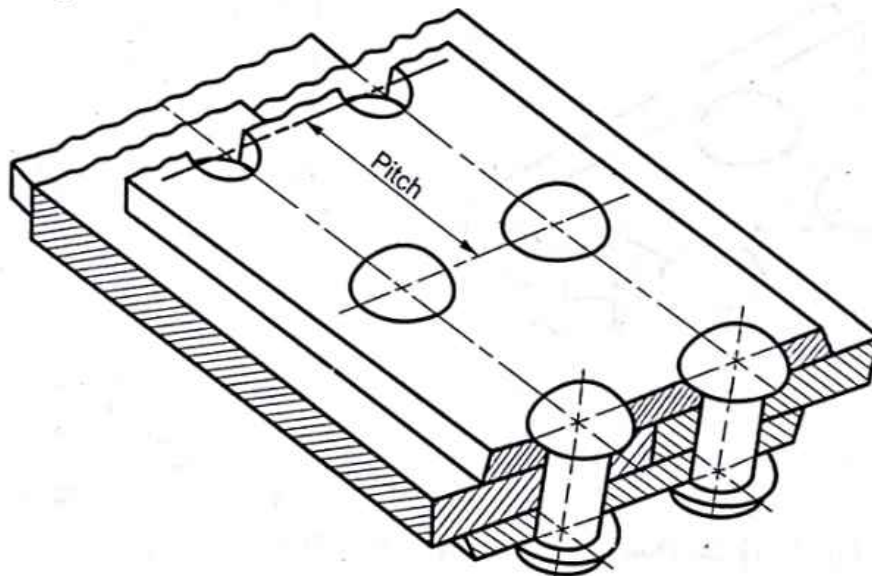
(a) Single riveted butt joint, double cover plate
